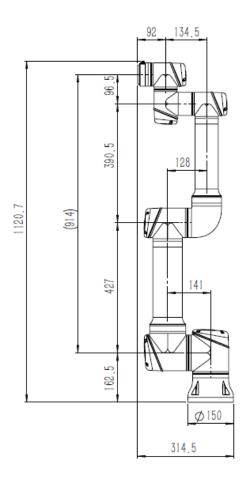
Mechanical dimensions of the CS66 robot, with unit of mm
